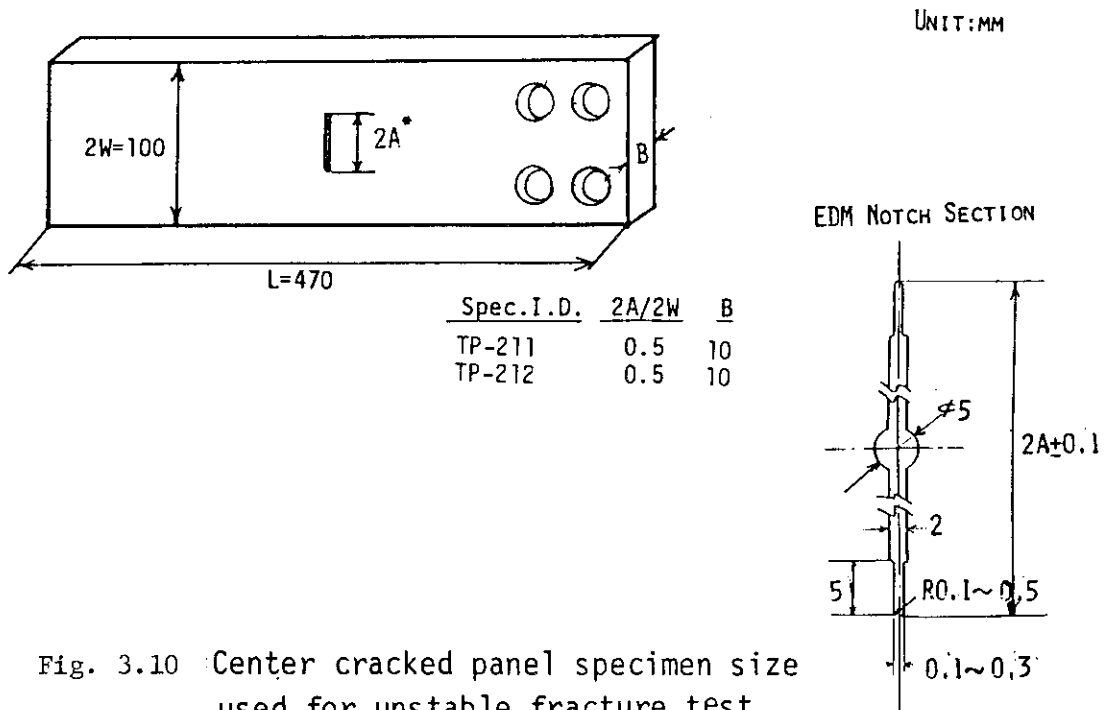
Center cracked panel specimen size used for unstable fracture test
